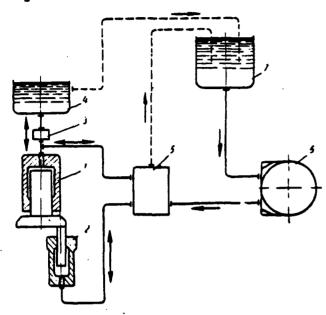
The schematic diagram of press with the pumping drive: 1 - working cylinder; 2 - cylinder of recurrent course; 3 - filler valve; 4 - filler tank; 5 - controls of press; 6 - pump; 7 - pumping tank.
